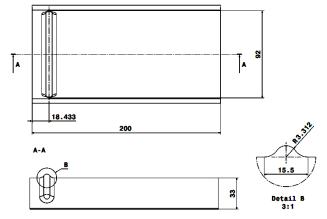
Details of bead-shaped trigger mechanism and TWT.
